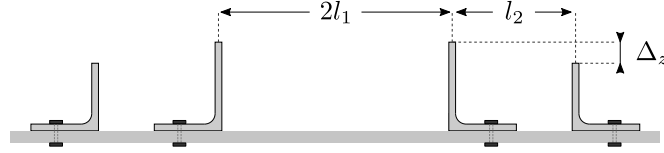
Front view of the four-point bending jig used for stress peen forming tests with dimensions.
